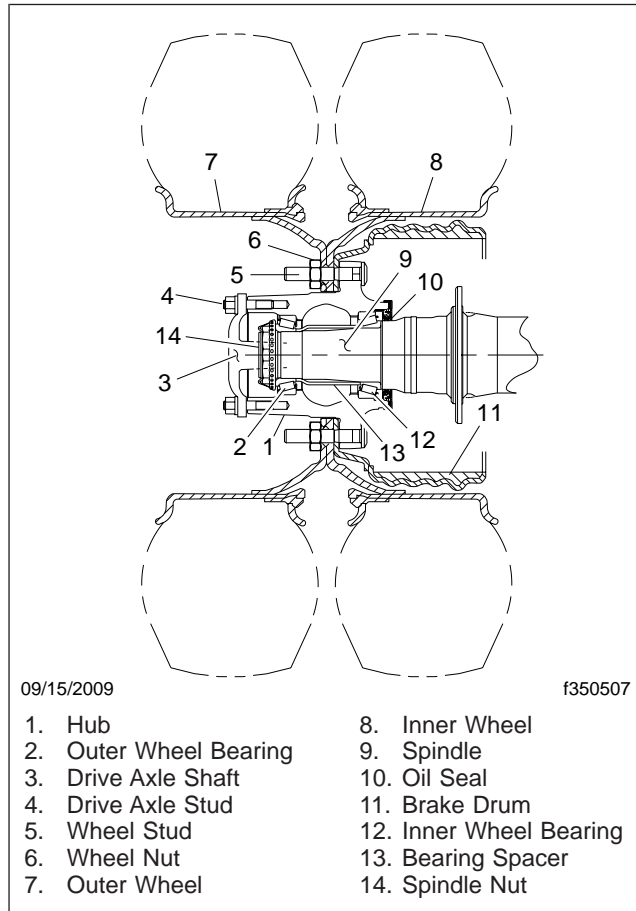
, Typical Wheel End Assembly with Drum Brakes
